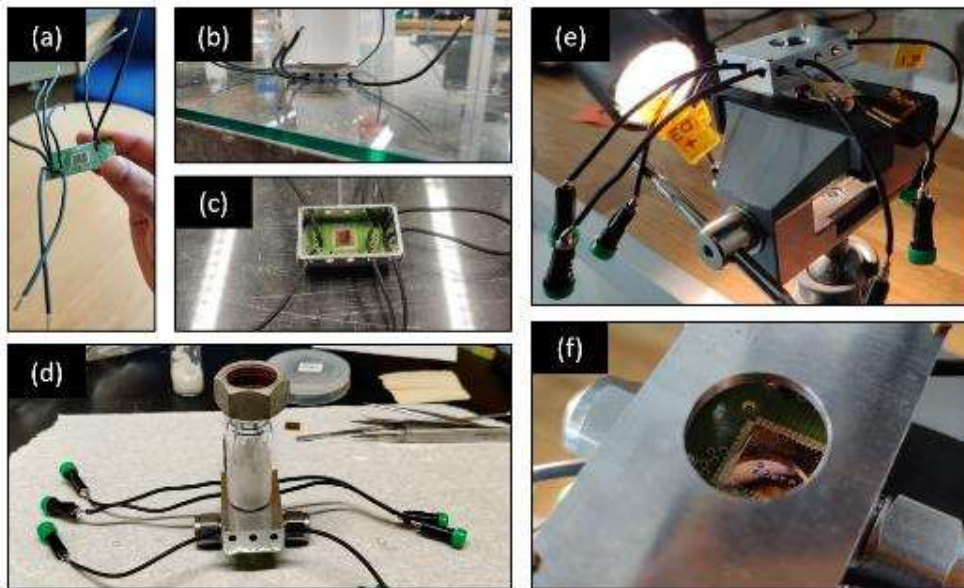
(a) Soldered wires to the chip-PCB packages, (b) Gluing the aluminum body to the package using Resbond 906 glue, (c) Soldering 4 mm female banana connectors to the soldered wires (d) Gluing the package to Swagelok cell (8 mm diameter) (e) Optical inspection of soot pathway, (f) Image with an optical focus on the chips in the MWP.
